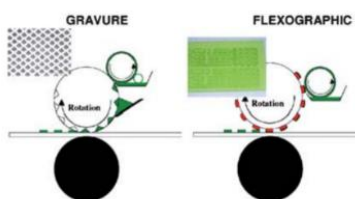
Gravure and Flexographic R2R Printing Techniques [49].
